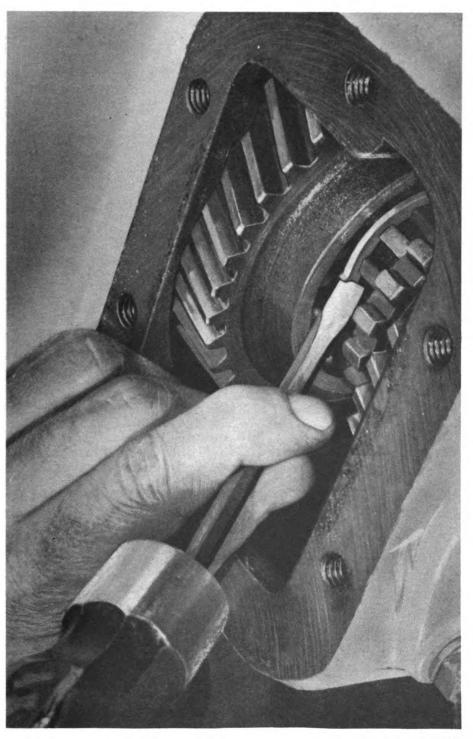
Pinion Front Bearing Cap, Speedometer Drive Gear, and Bearing Adjusting Nut Removed
